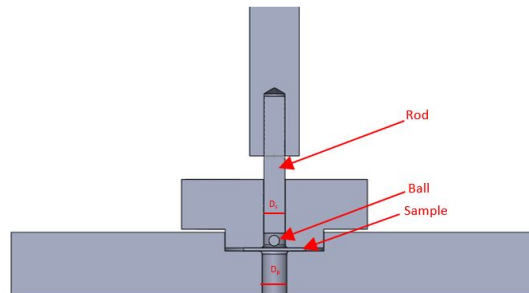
Small Punch Test Machine focus on the rod. D_s : Diameter of the hole in order to let the rod pass and D_p : diameter of the hole
